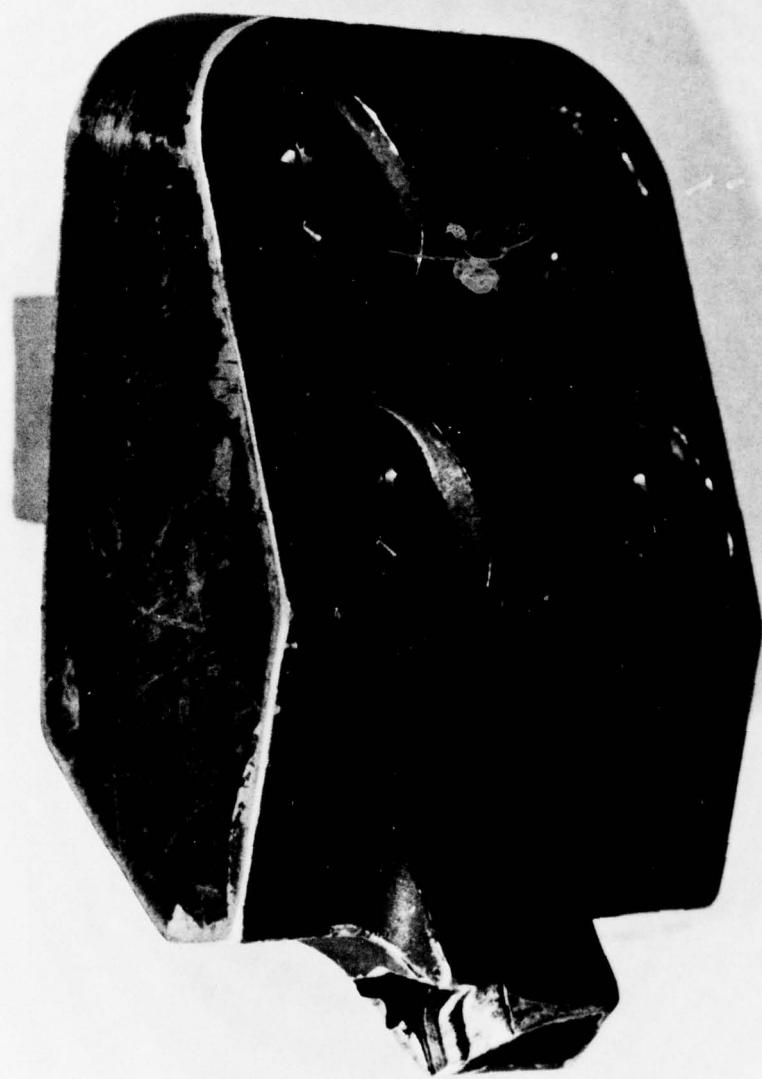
Failed Canopy Support Fitting - Part No. 160D116049-12
